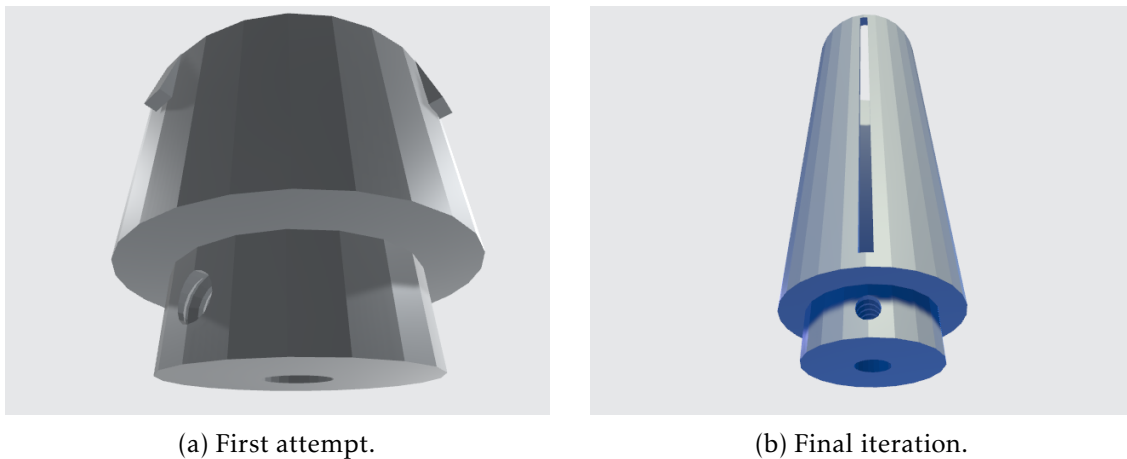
CAD drawing of the parts to be 3d printed to couple the motor with the filter roll.
